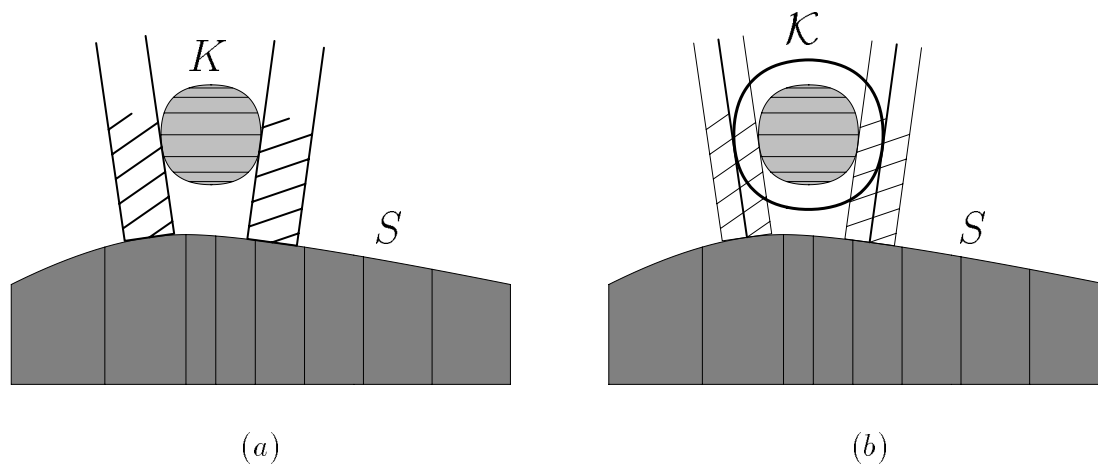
Using 5-axis milling, the flat end tool axis is aligned with the surface normal (a). The flat end tool will be tangent to the check surface, K , if and only if the tool central axis is tangent to the offset of K by the tool radius, \mathcal{K} (b).
